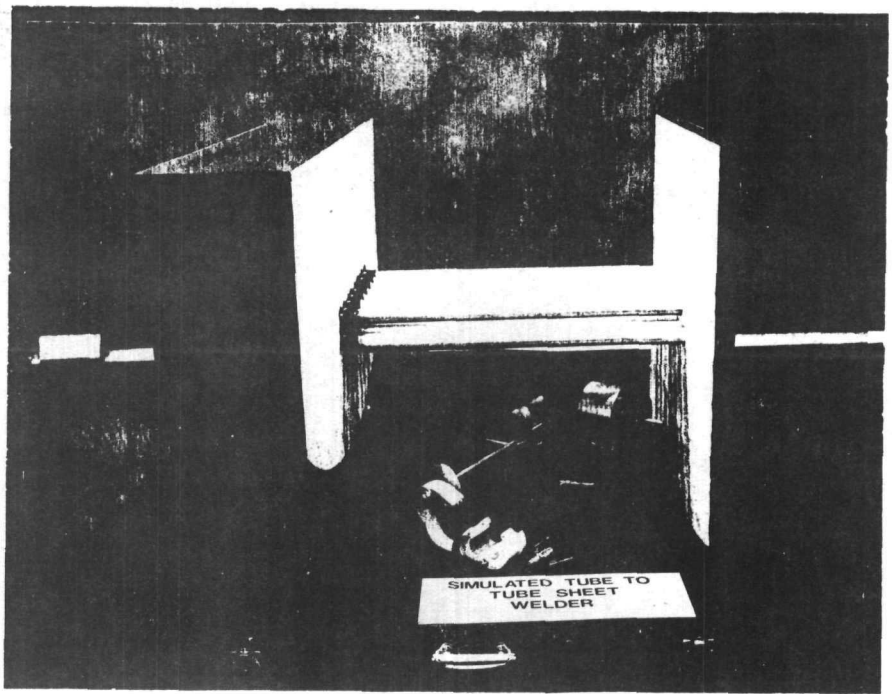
(a) TUBE TO TUBE SHEET WELDING MOCK-UP DISPLAYED WITH PARTIAL SEGMENT OF TUBE SHEET WITH TUBES ARRAYED AS THEY WOULD BE IN A NORMAL MANUFACTURING SEQUENCE.
